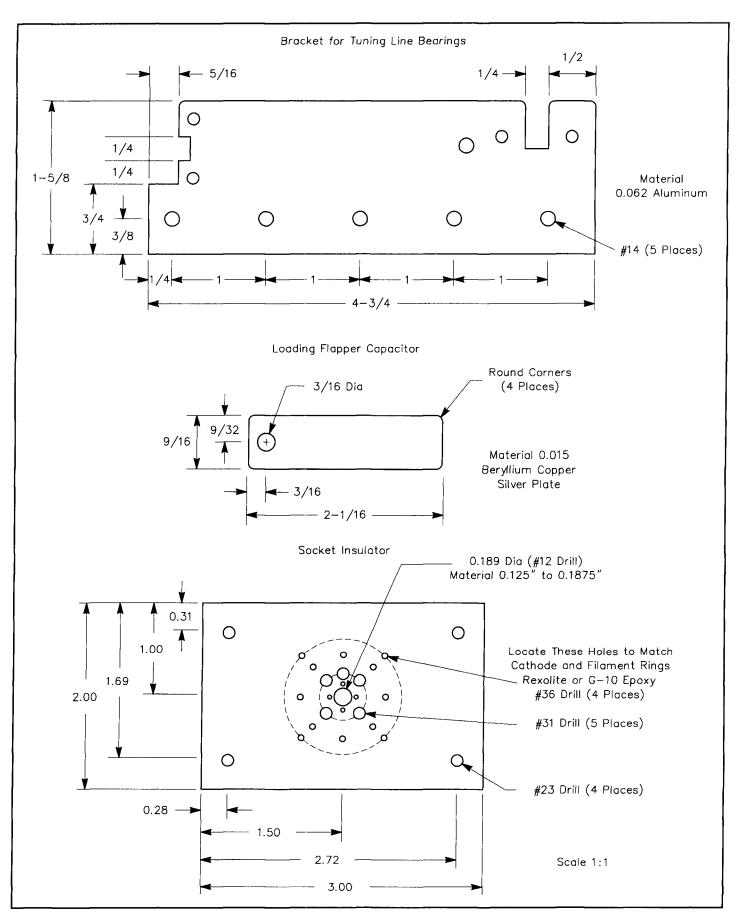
This drawing shows the tuning-line bearings bracket (top), made from 0.062-in. thick aluminum; plate-loading flapper capacitor (center), made from 0.015-in. thick beryllium copper, silver plated; tube socket insulator, made from Revolite or G-10 epoxy sheet.
